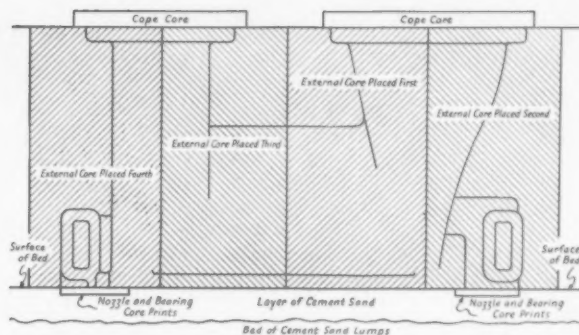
Using external cores, this casting would need large, heavy pattern equipment of prohibitive cost.
